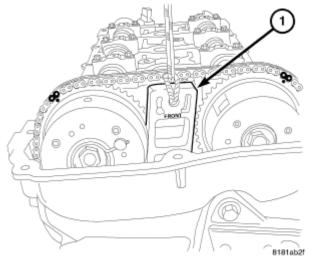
WEDGE TOOL 9701 Courtesy of CHRYSLER LLC
